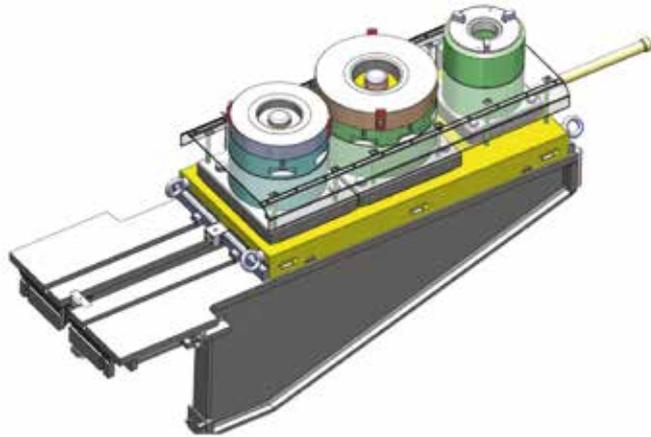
lower die for preform forging mounted on the die-holder shuttle
